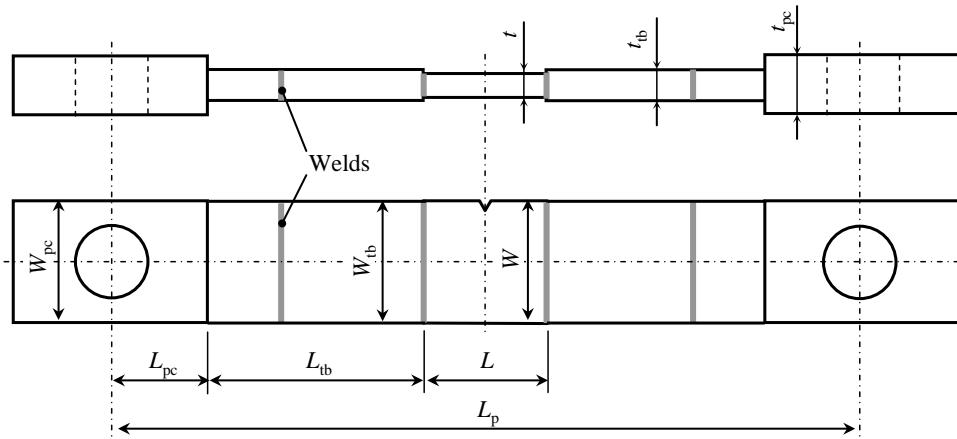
Definitions of dimensions of tab plates and pin chucks
